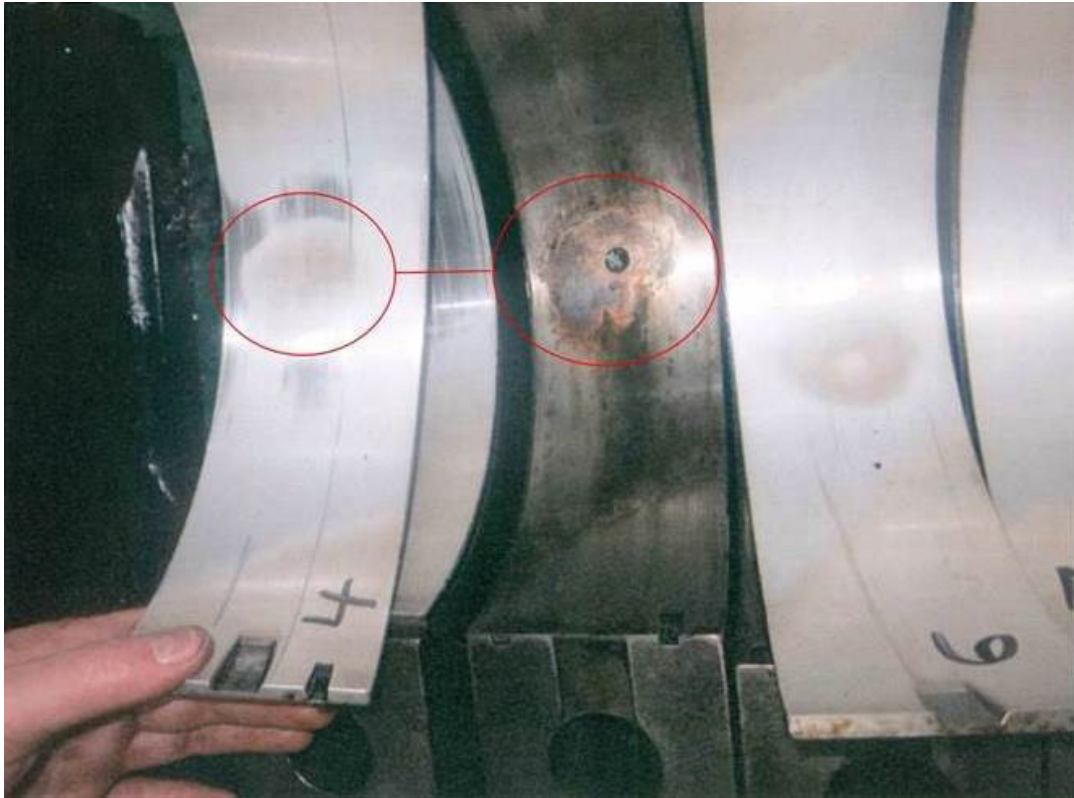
Example of fretting / corrosion and related visible imprint at the main bearing shell.
